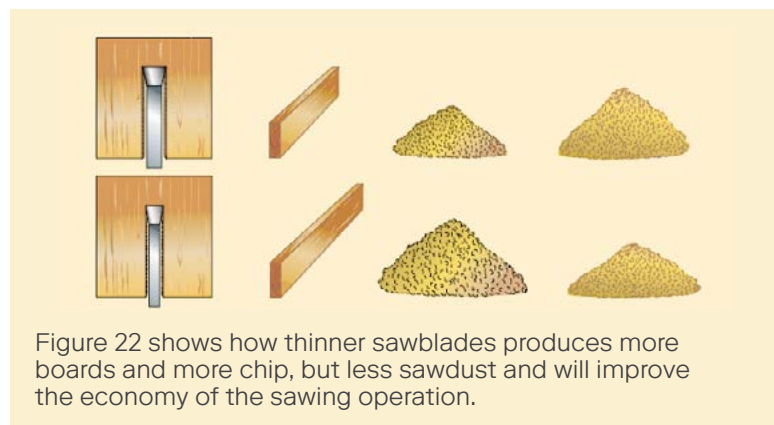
shows how thinner sawblades produces more boards and more chip, but less sawdust and will improve the economy of the sawing operation.
